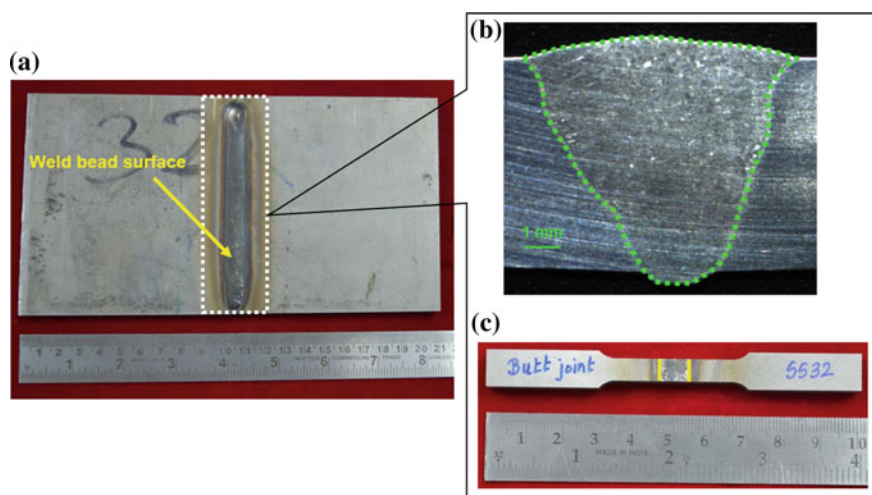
a Butt weld geometry made of A-TIG welding, b macrostructure of butt joint and c sample for the tensile test
